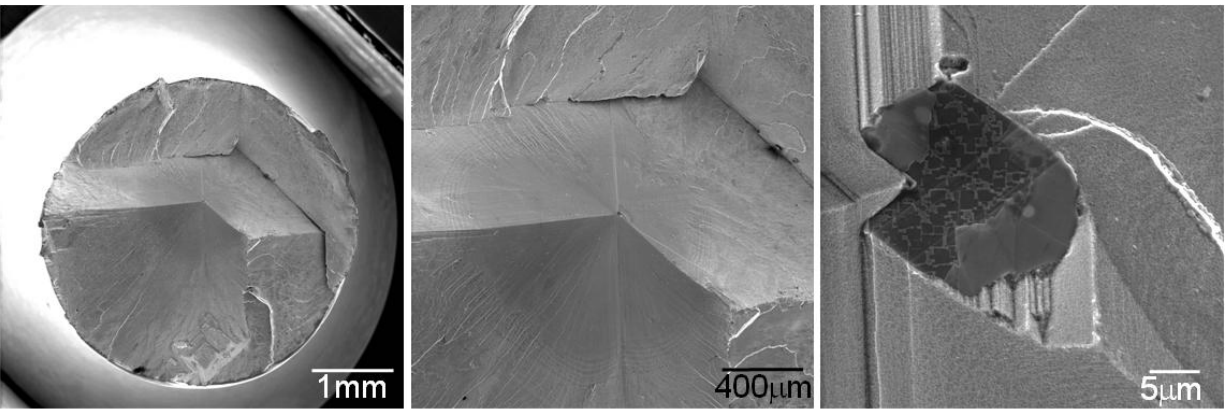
Fracture surface showing internal initiation from a eutectic and fatigue crack growth along multiple (111) planes ($N_f = 125,000$ cycles).
